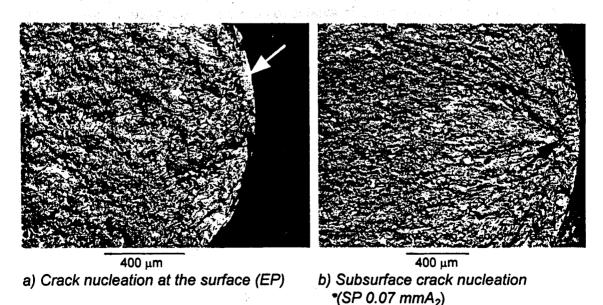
Fracture surfaces (SEM) of LF in rotating beam loading (σ_a = 750 MPa)
